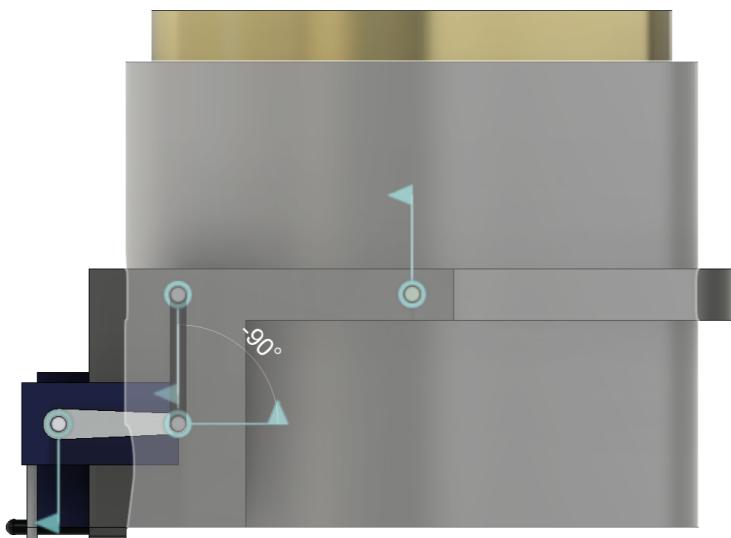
Side view of the thrust vectoring mechanism (Version 2)
